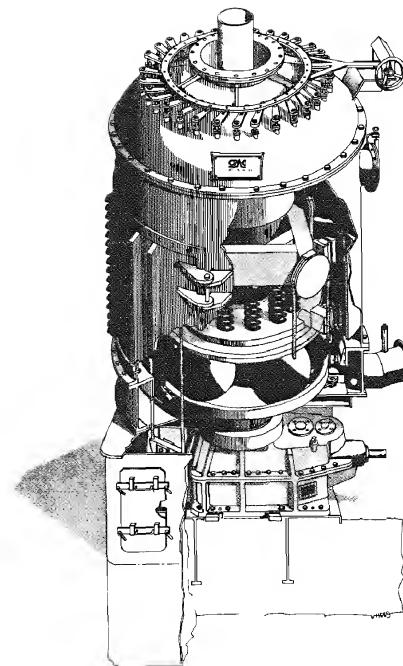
Ring-ball mill for coal grinding; standard type, designed to resist pressure surge (Claudius Peters)
